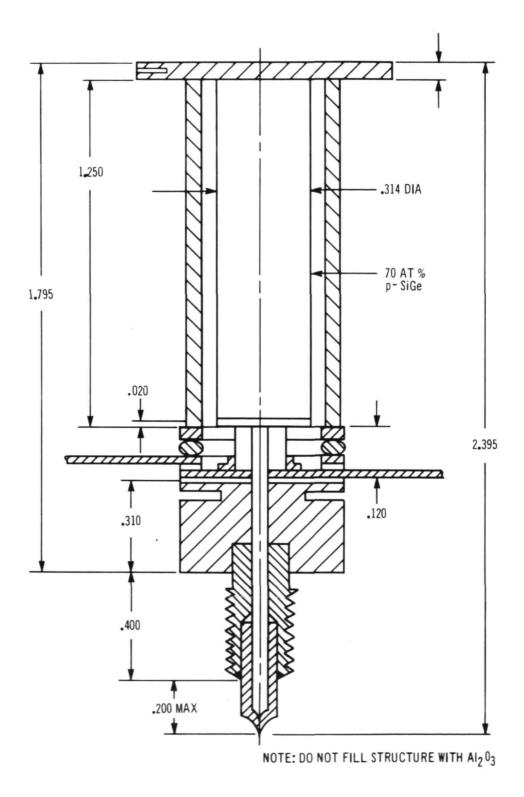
Hybrid Thermo coup le Assembly - Design BX - 1
